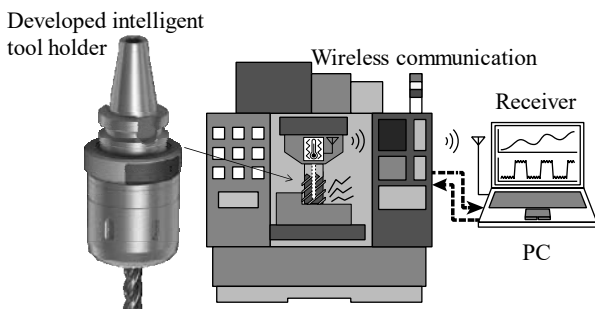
Developed intelligent tool holder equipped with wireless communication.
